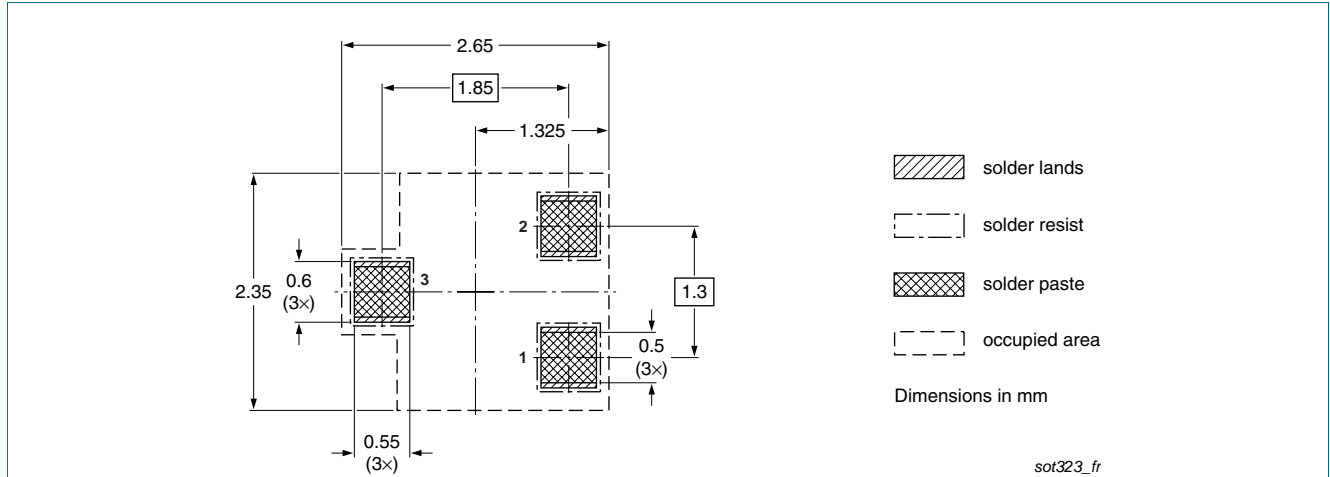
Reflow soldering footprint for SOT323 (SC-70)
